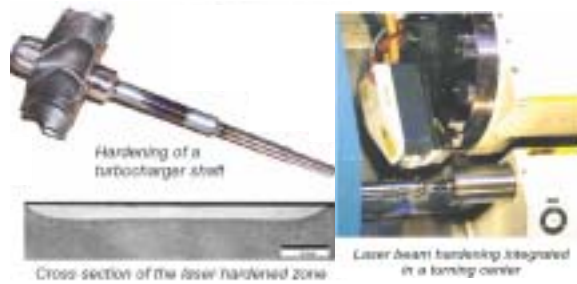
Laser hardening of turbocharger shaft (Fraunhofer USA).
